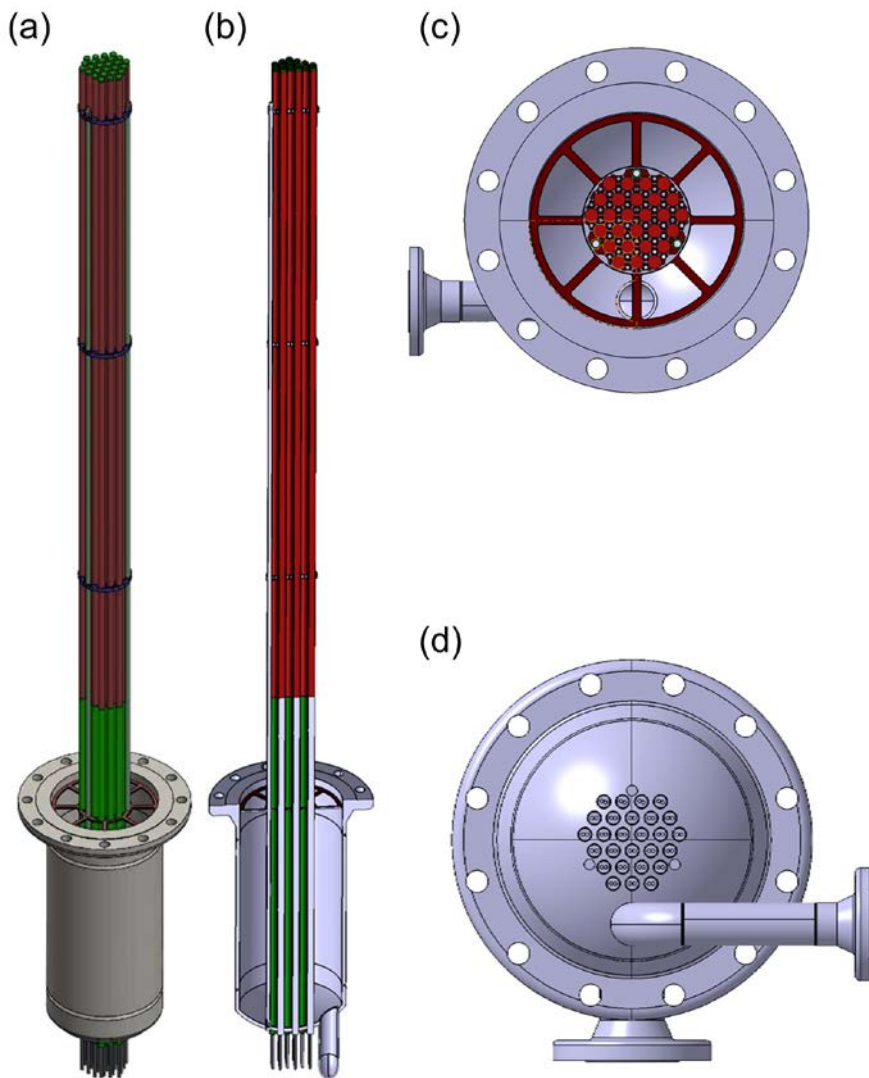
Three-dimensional model of PILLAR lower plenum and heater rods assembly in several viewpoints. (a) Isomeric view, (b) cross-sectional view in z-direction, (c) top view, and (d) bottom view
